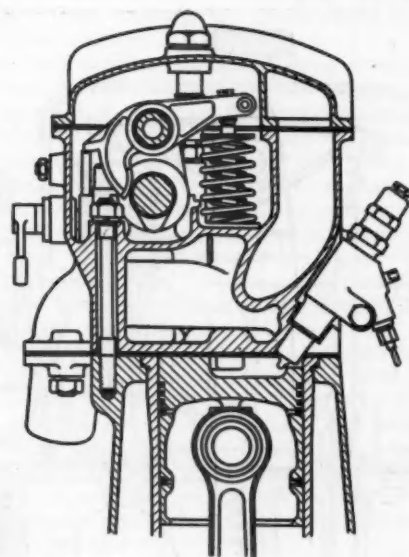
Direct-injection Chamber, using Turbulent Air Movement
